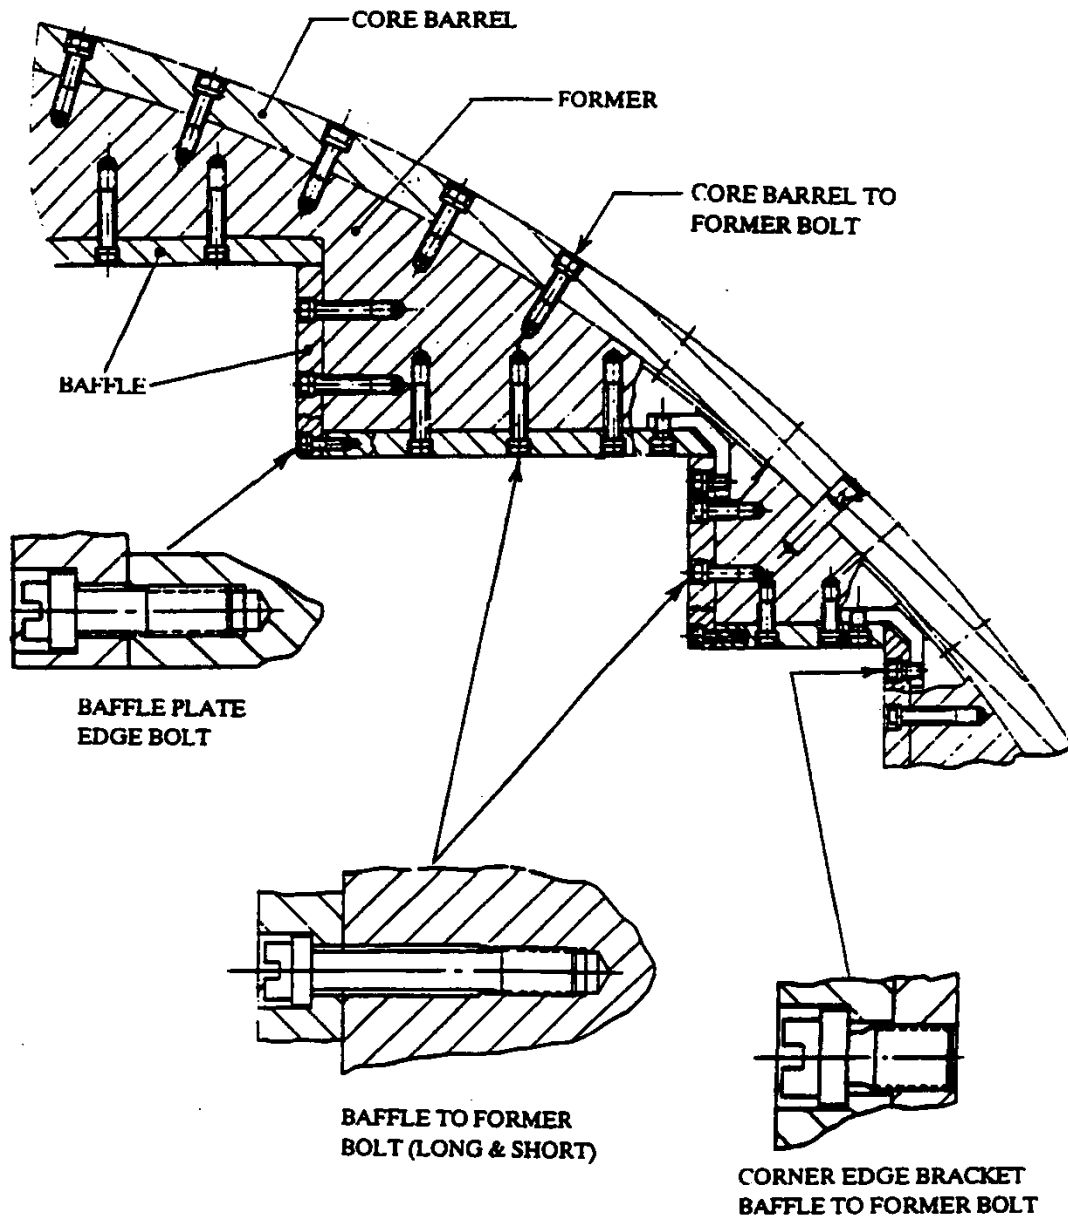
Baffle-Former-Barrel Bolting
